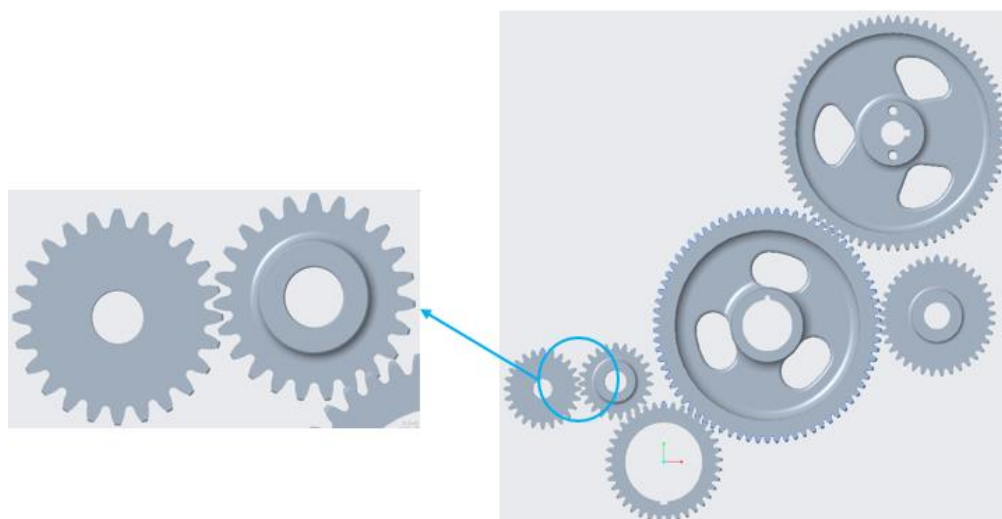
3D model showing the gear train arrangement employing standard spur gears
